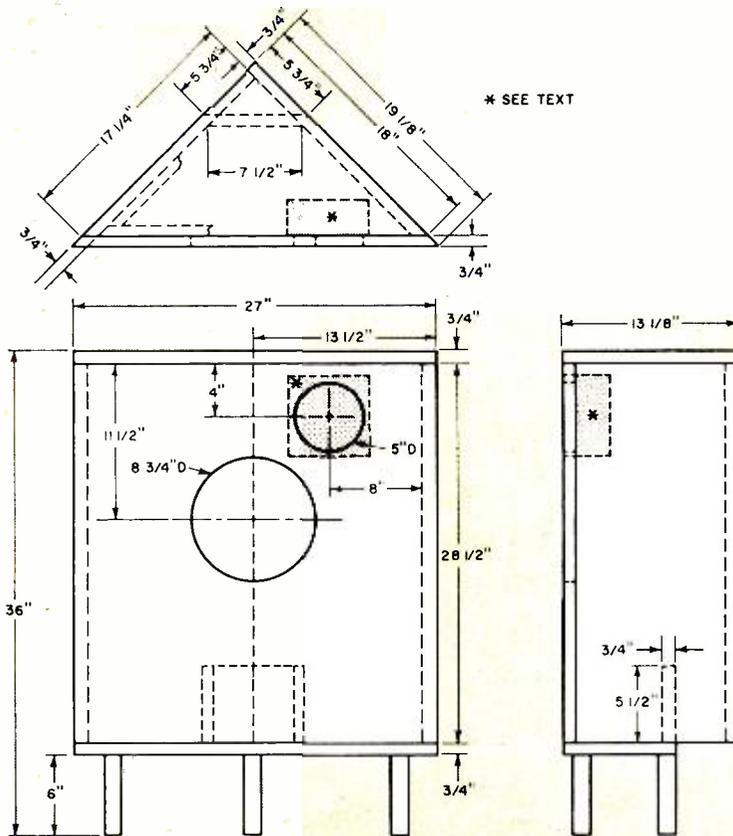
Mating surfaces between speaker board and sides of enclosure (as well as port front) must be cut at 45° angles to insure proper mating of parts and airtight seal.
